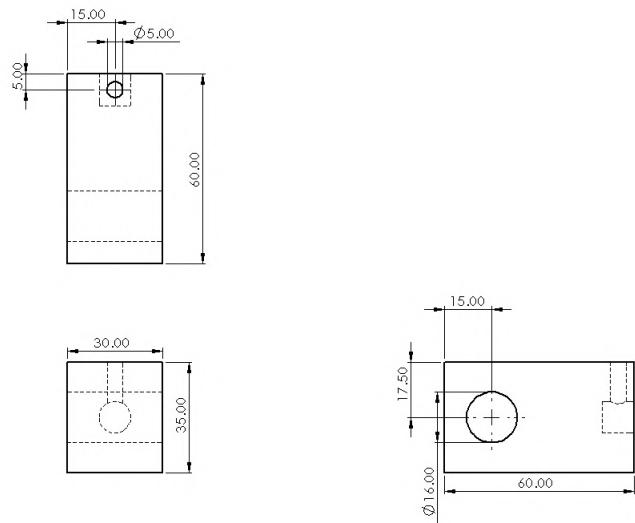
2D Drawing of the leg connector (All dimensions are in mm)
